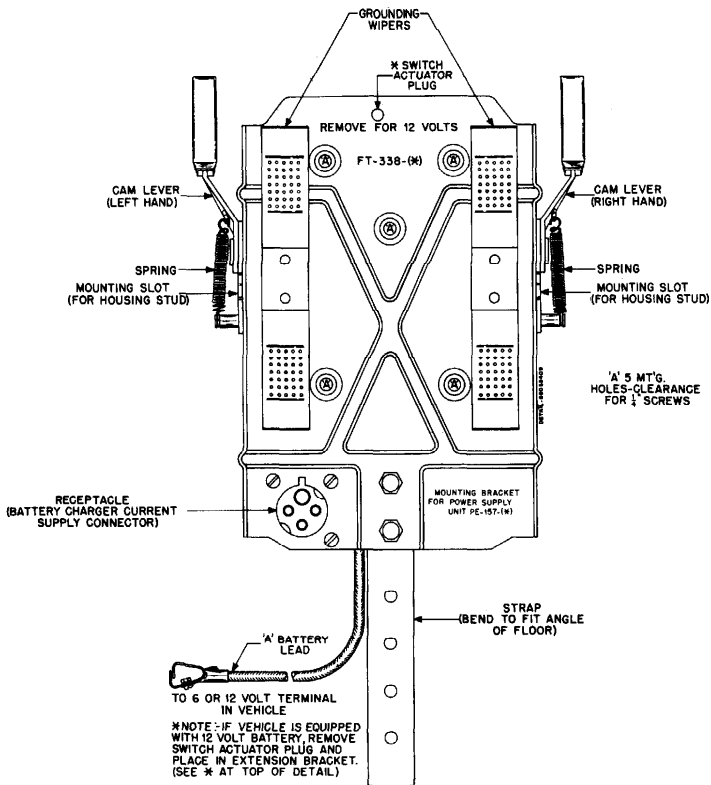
Main Mounting Bracket FT-338-(\*), Front View
